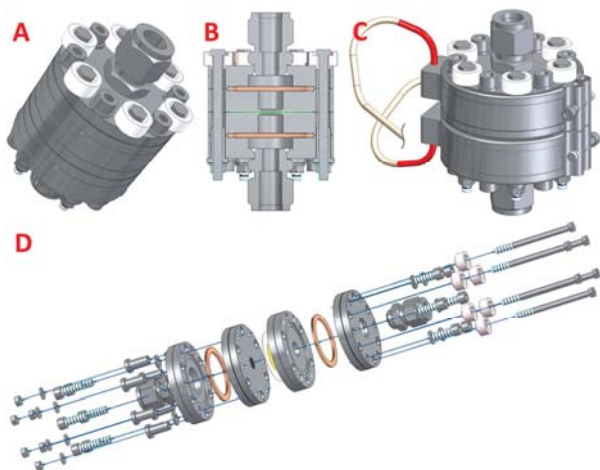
3D views of the experimental cell: (A) assembled experimental cell; (B) transverse sectional view with indication of the BASE (green) and ring gaskets (copper); (C) assembled cell with electric band heaters installed; (D) exploded view with focus on bolts assembly.
